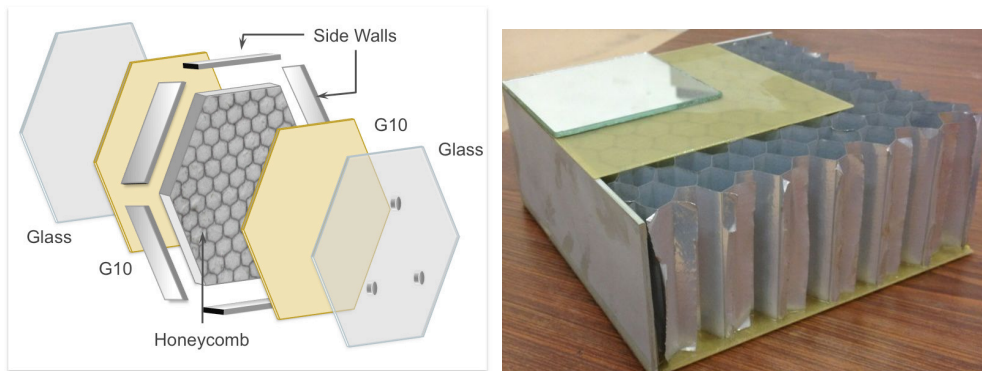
Exploded view of the mirrors (left panel), and real exploded model (right panel).
